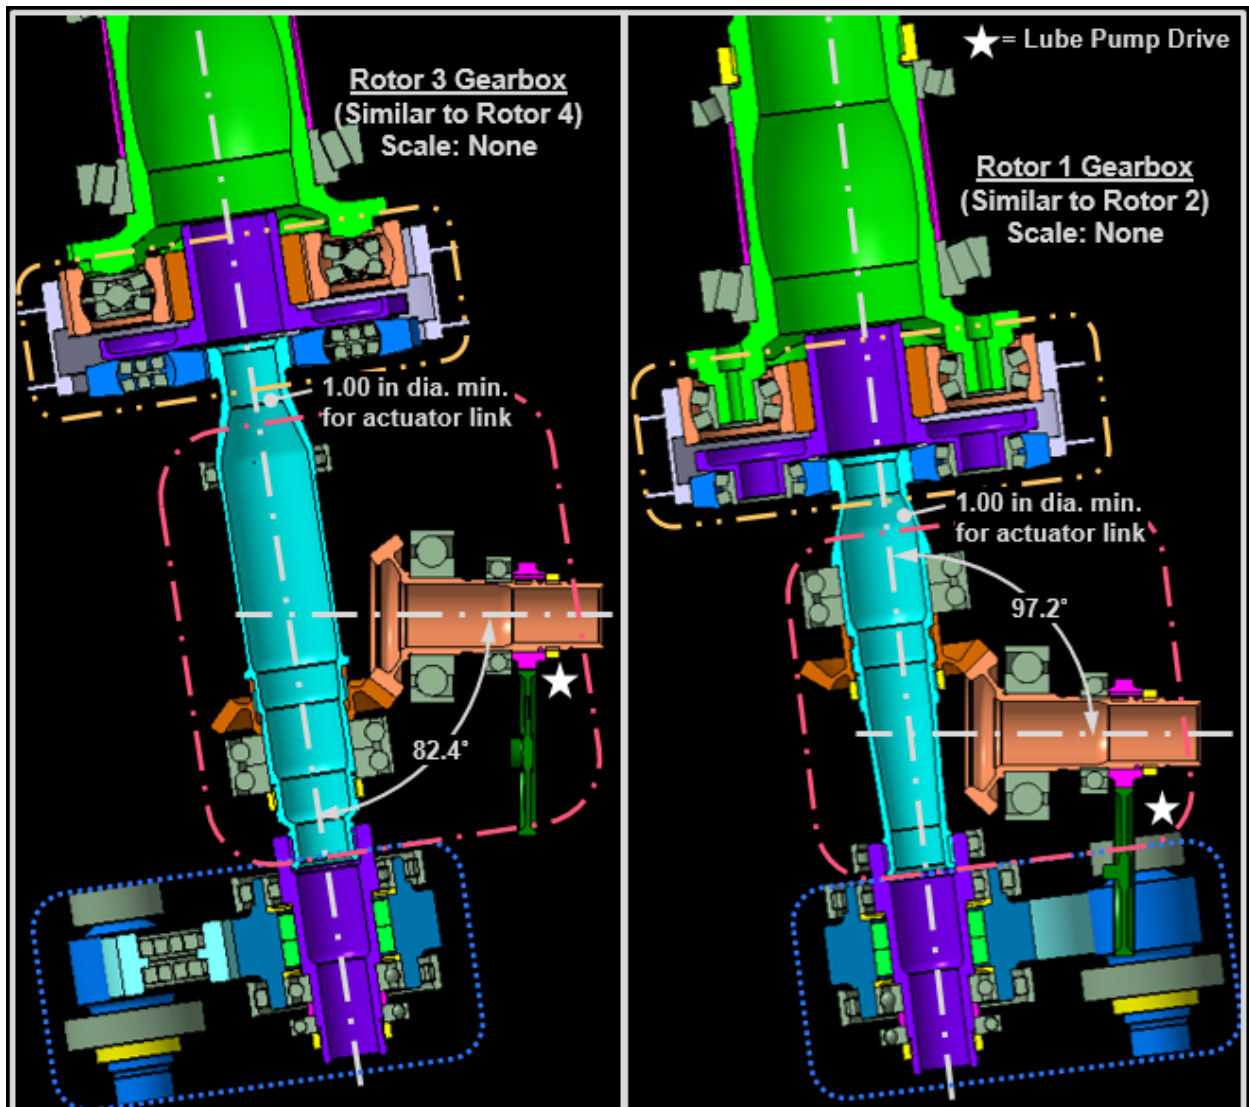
eQuad Gear Mesh Locations. Blue dashed line indicates motor gearbox mesh. Red dot-dashed line indicates rotor gearbox spiral bevel gear mesh. Yellow double-dot-dashed line indicates rotor gearbox two stage planetary system.
